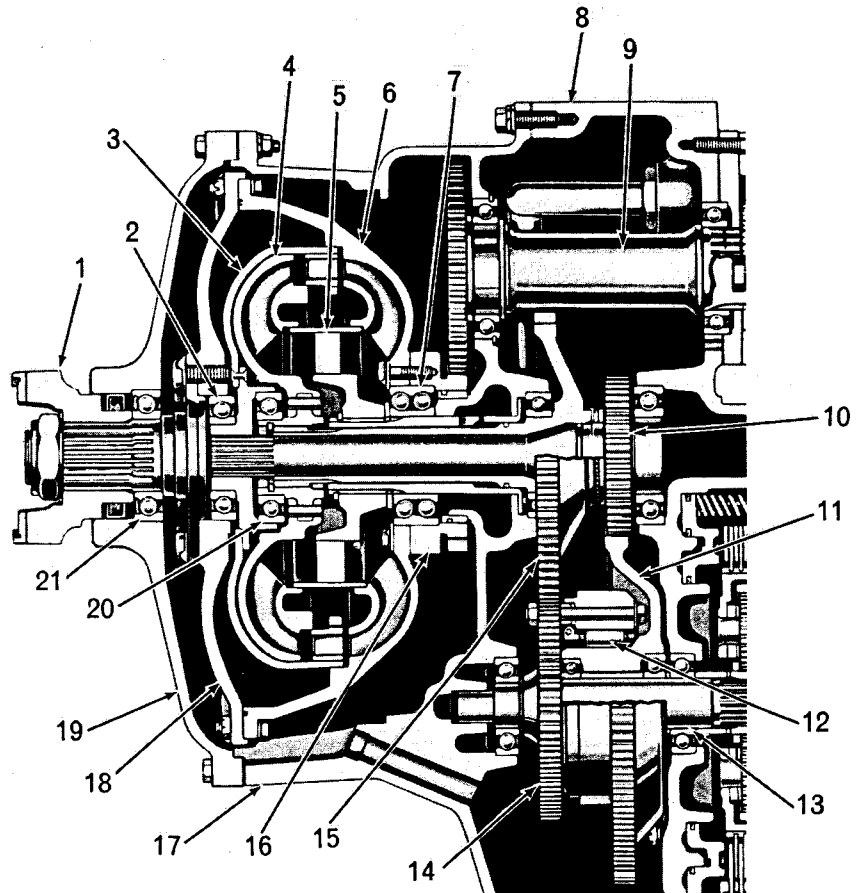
Typical twin-turbine torque converter and converter gearing
